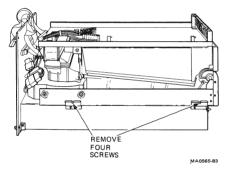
Separating the Tabletop Component and Power Supply Assemblies
